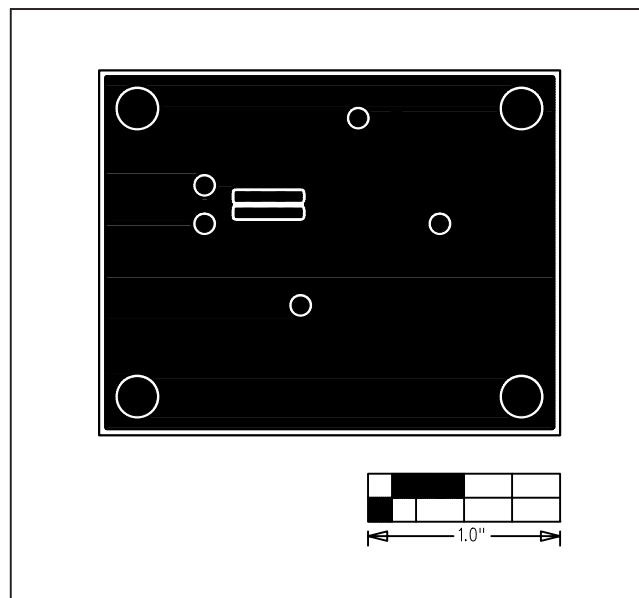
MAX9945 EV Kit PCB Layout—Solder Side
